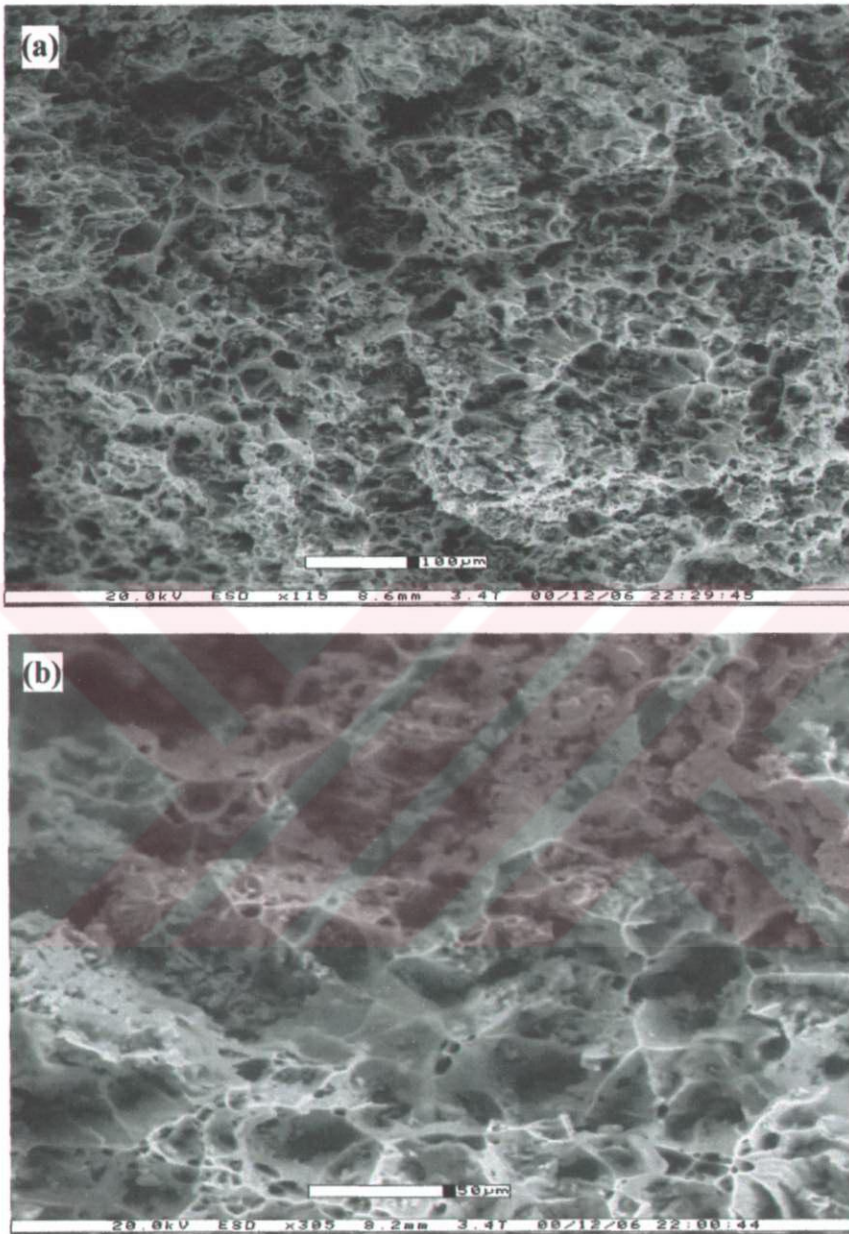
28 Fracture surfaces for the thermally cycled (a) AlSi7/SiC/20_p composite and (b) AlSi7 alloy showing dispersed dimples on the fracture surface.
